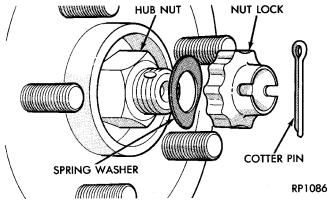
Cotter Pin, Nut Lock, And Spring Washer
